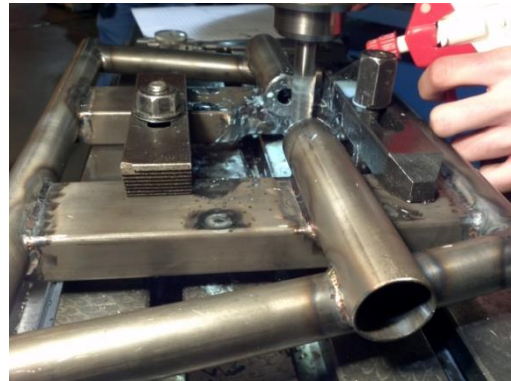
The bulkhead on the mill for final post machining after welding.
